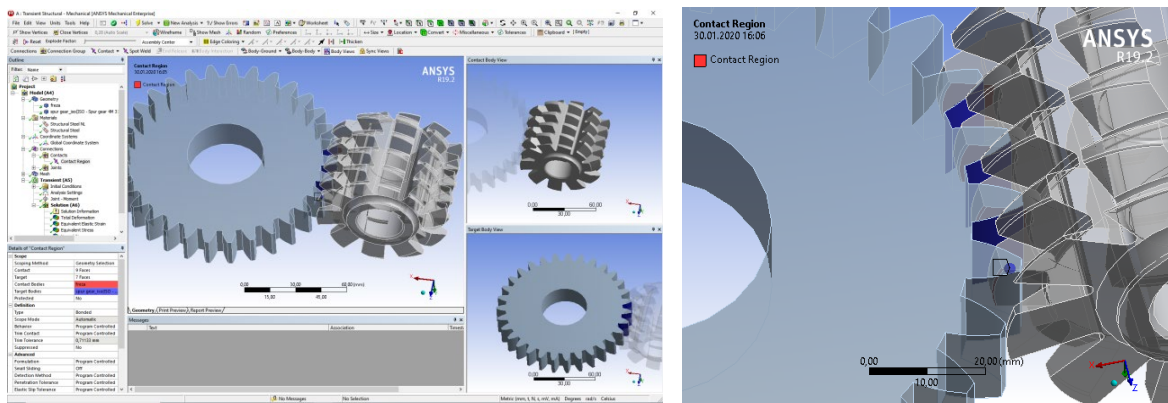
(a) The contact surfaces (region) between the hob gear cutter and the spur gear, and (b) contact detail
